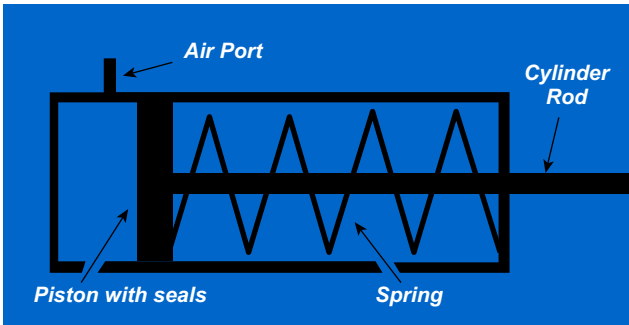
Symbol for a typical single-acting, single-rod spring-return air cylinder.
